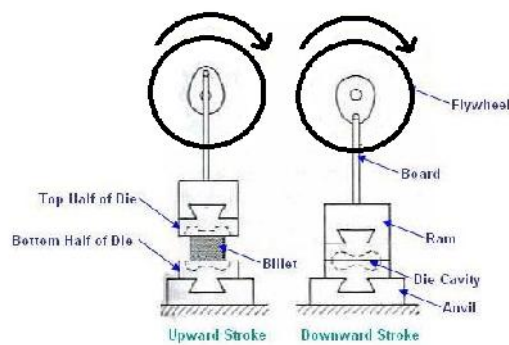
Schematic of a Mechanical Forging with Eccentric Drive [20]
